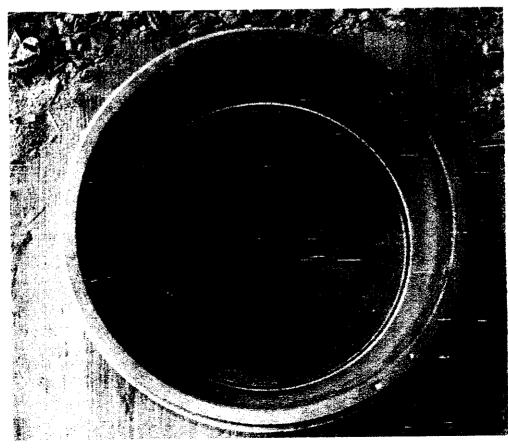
REAR VIEW 10TG BRAKE DRUM
